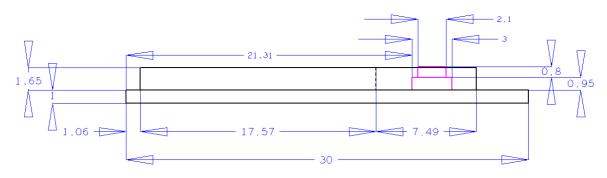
QFM-2202 module dimensions side view (unit: mm)
